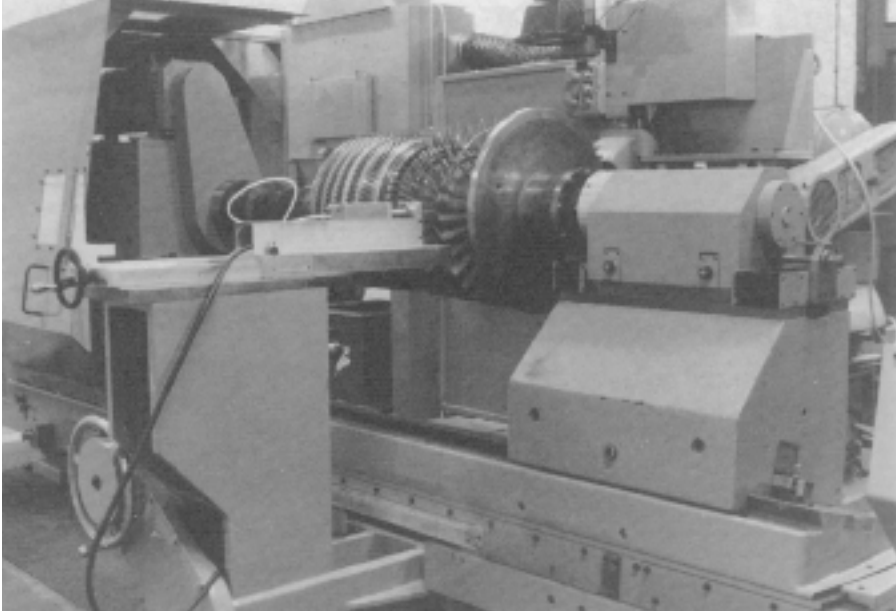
A typical tip-grind machine, based on a manual grinding machine fitted with three axis read out and the electromechanical measurement system developed by Davidson *et al.* (1983).
